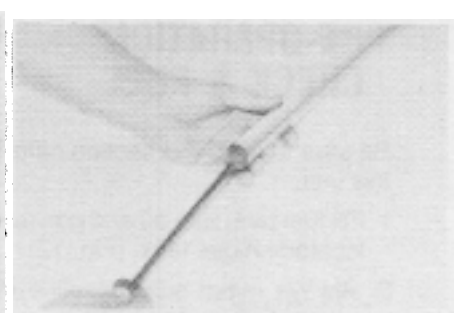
Remove Flex Drive Shaft from plastic bag and install Shaft into lower portion of trimmer. Flex Shaft may require some extra force to push past bend in Boom. Rotate Flex Shaft until it has engaged into cutting head.
